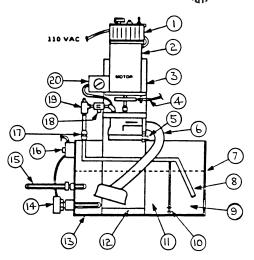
Oil Pressure Relief Valve Adjuster
